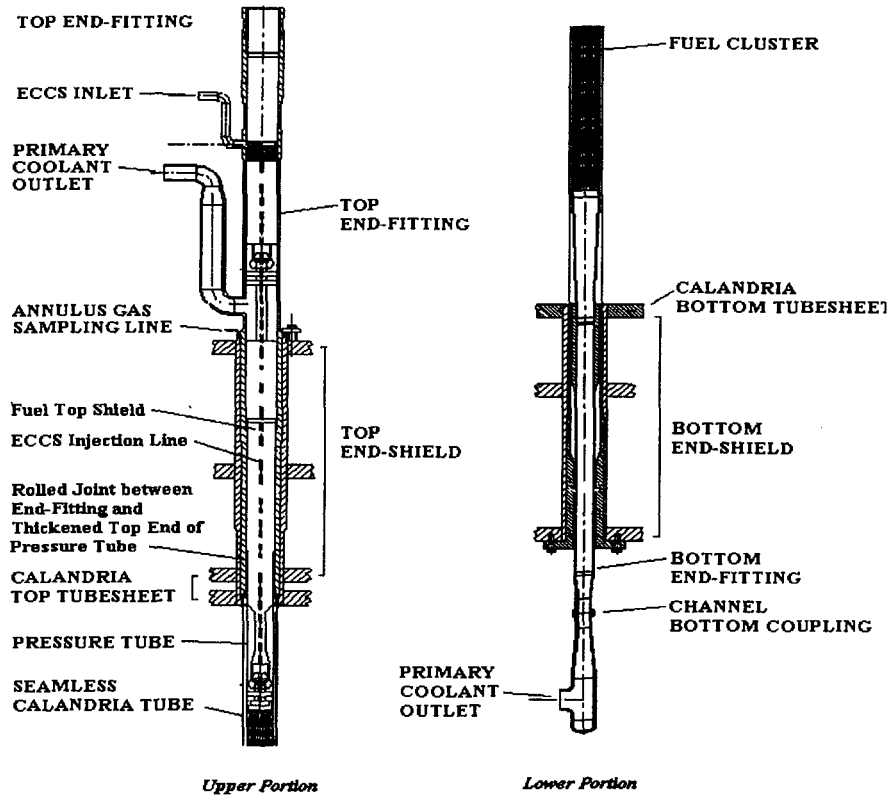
Coolant channel assembly of AHWR, also showing fuel, and portions of end-shields
